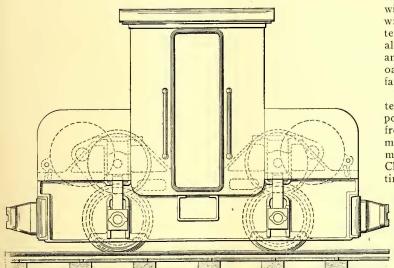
MOUNTING LARGE MOTORS ON A NARROW GAGE
